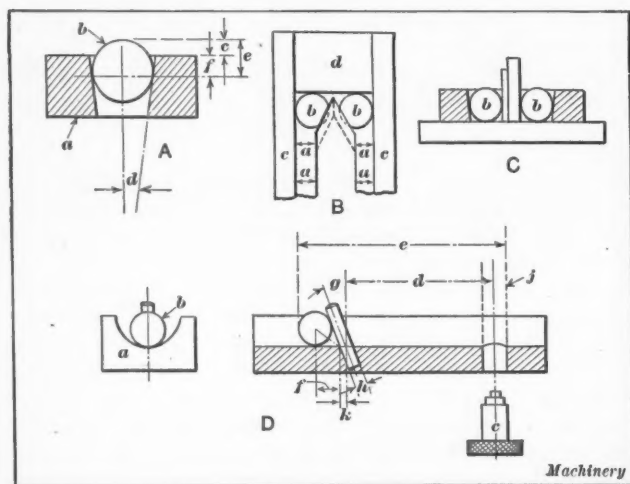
Methods of using accurately finished balls for checking Gage Measurements
